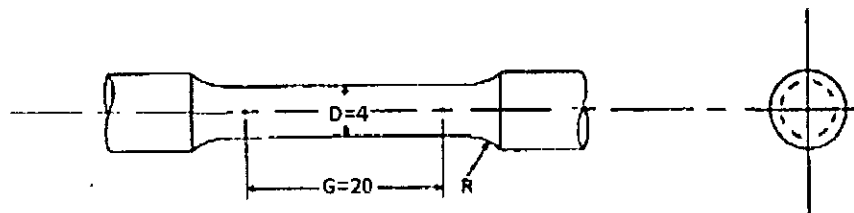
Dimensions of tensile specimen (all dimensions in mm) [165]
